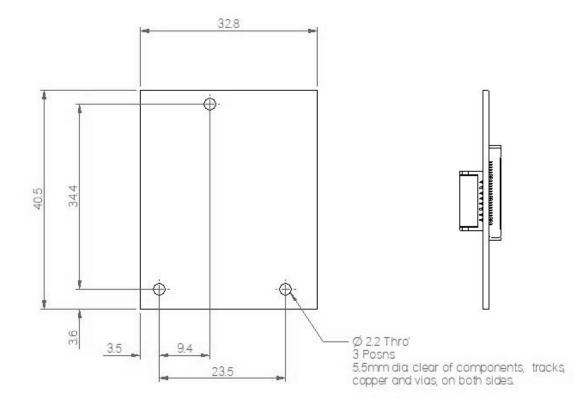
Mechanical overview of the Harrier Ethernet Connection Board; all dimensions in mm. (Note – side shown carries the JST connectors, FFC connector is on the reverse side)
